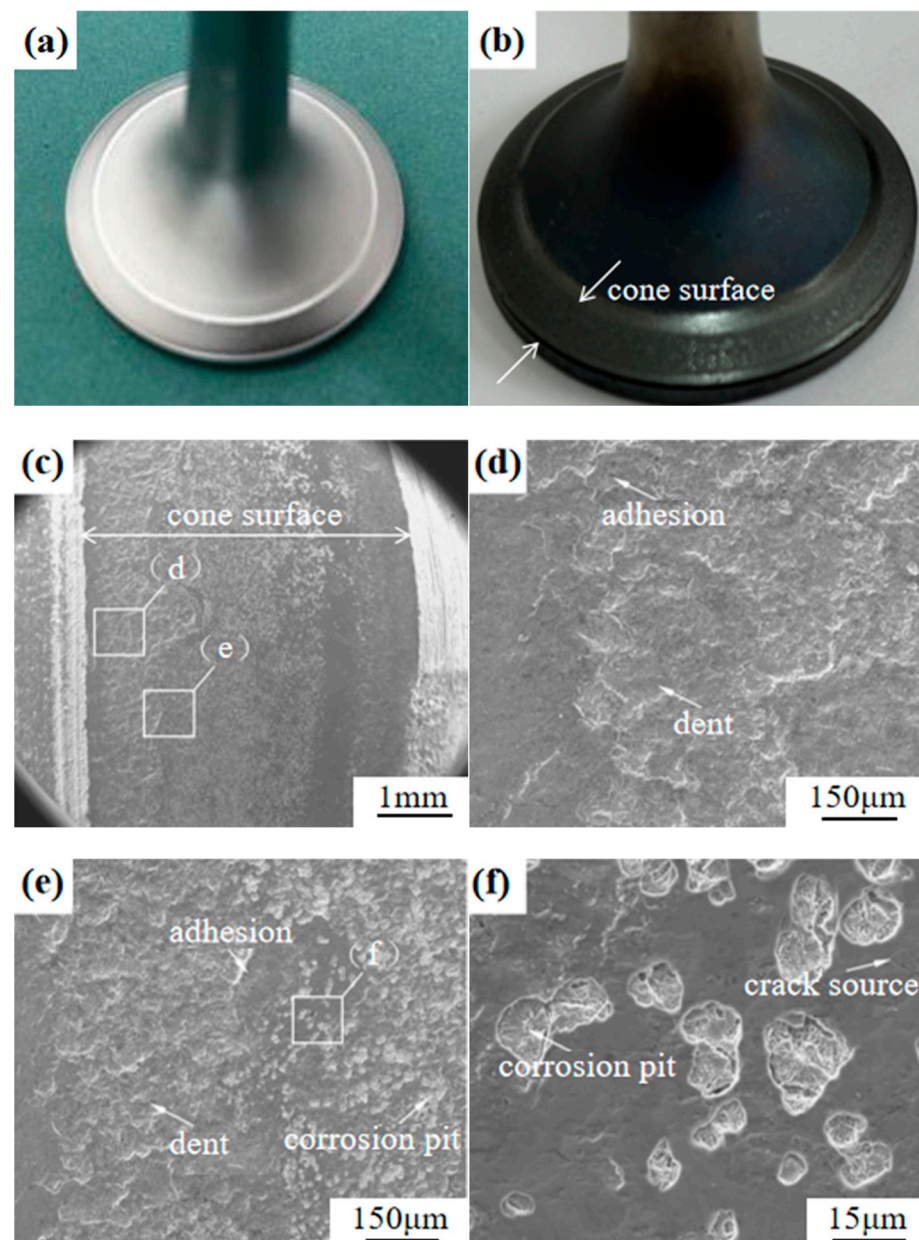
Wear morphology of CrN coating. (a) before wear; (b) after wear; (c) microscopic morphology of cone surface; (d,e) enlarged area in Figure 8c; (f) enlarged area in Figure 8e.
